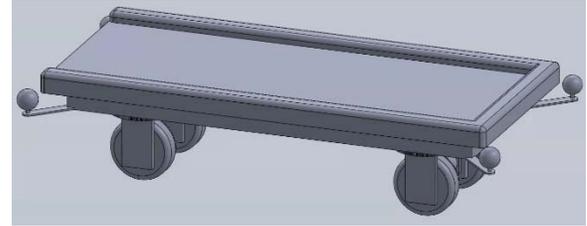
Complete vehicle with upper platform that is designed to handle large shipping containers
